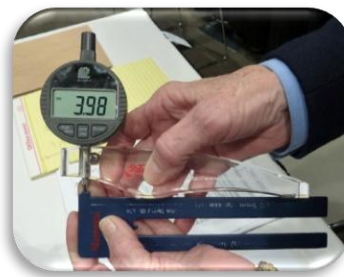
Easy method for checking the net gauge by using the digital thickness device
